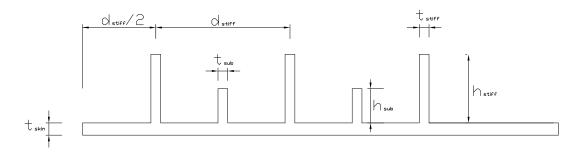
Straight Stiffened Plate with Sub stiffeners
